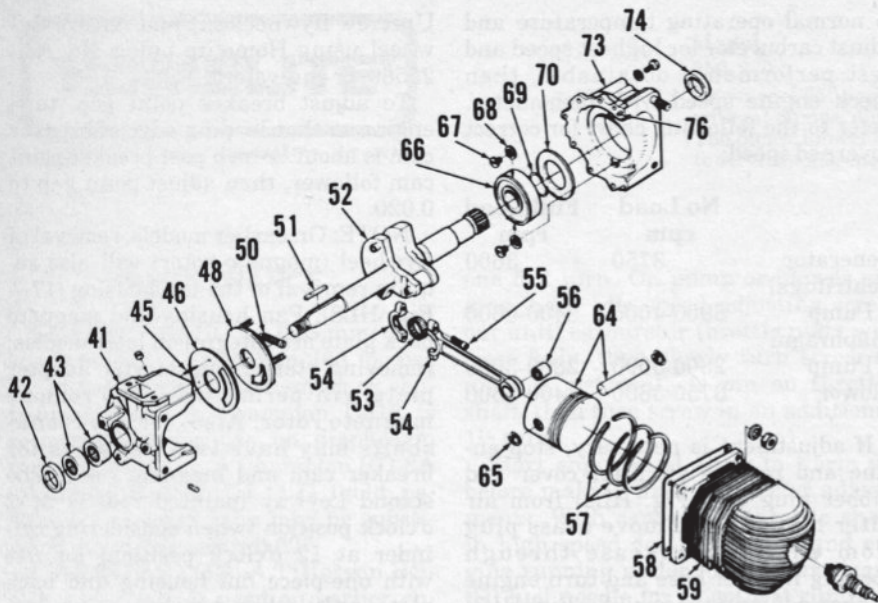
Exploded view of engine. Crankshaft end play is controlled by ball bearing (66). Three different crankshafts are used; shaft shown is for diaphragm pump. Crankshaft for generator has tapered end with threaded counterbore for armature retaining bolt. Crankshaft for other applications has externally threaded end.
